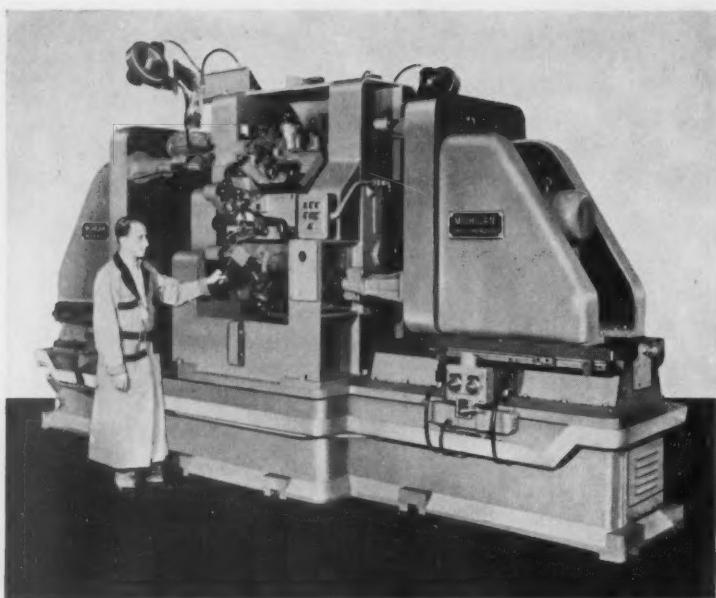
Trunnion type automatic indexing, double-end drilling and assembling machine built by Michigan Drill Head Co.
